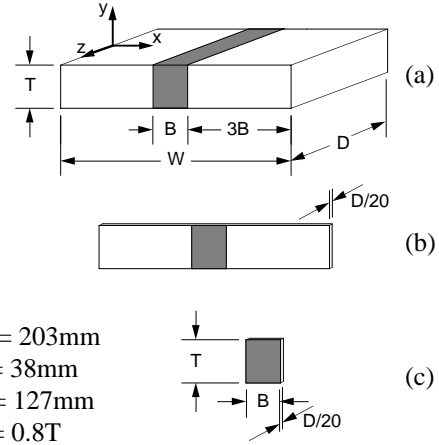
(a) Block of material removed from a welded joint, (b) slice removed from the block, and (c) chunk removed from the slice. The chunk would further be sectioned into dice.
